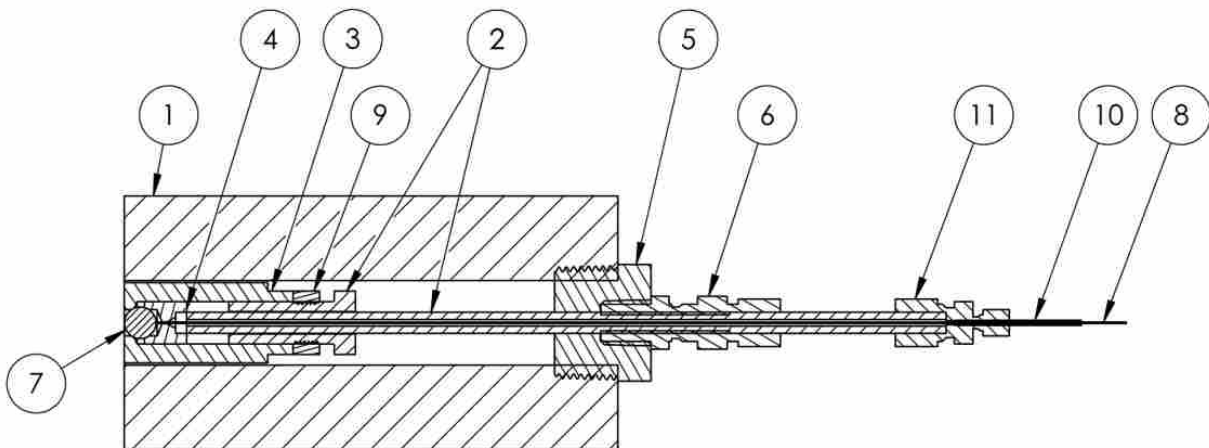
High-pressure optical probe assembly drawing. See Appendix B for complete engineering drawings of the high-pressure probe.
